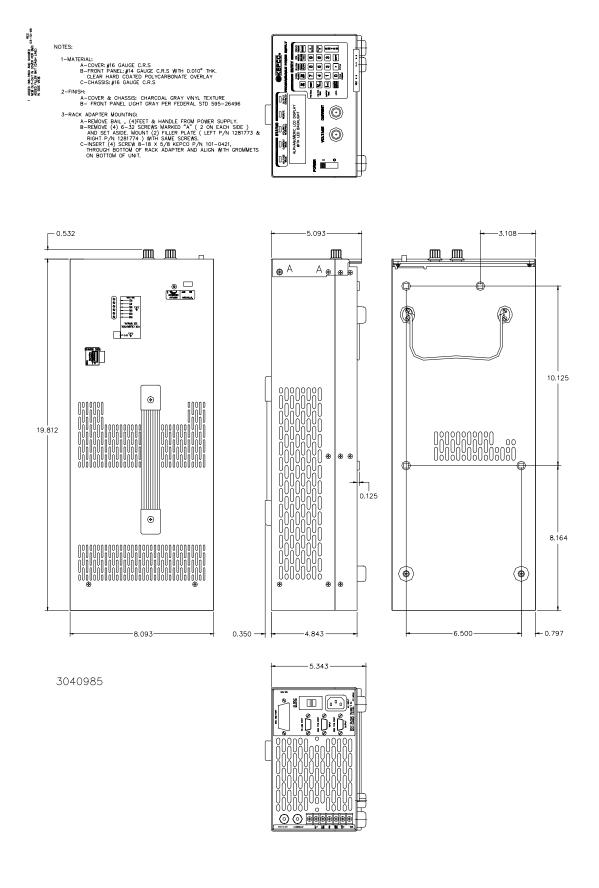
MBT SERIES POWER SUPPLY, MECHANICAL OUTLINE DRAWING
